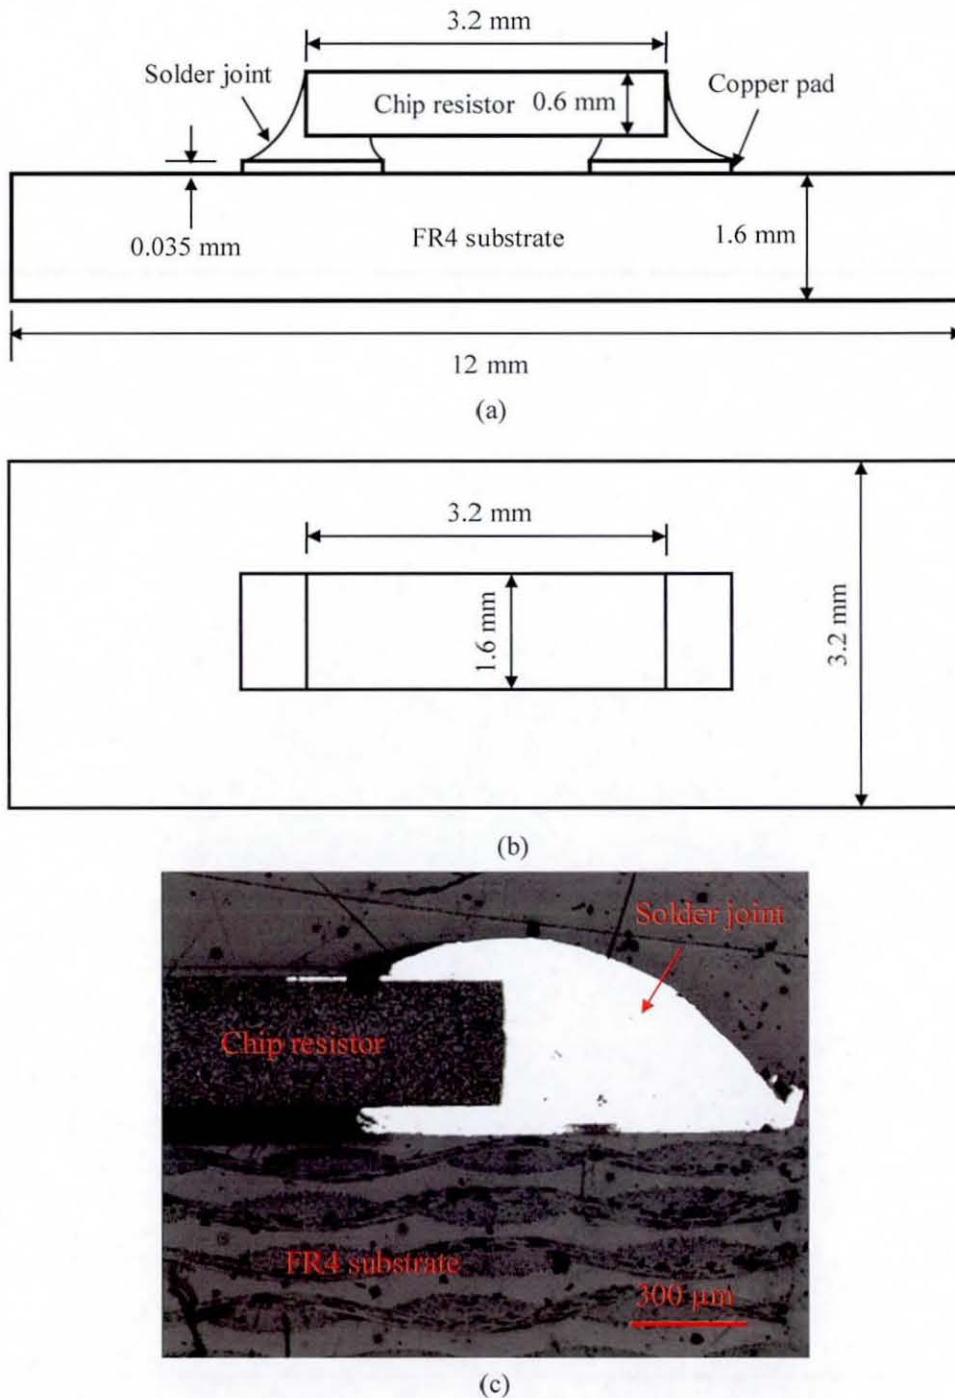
Components of the chip resistor assembly: (a) front view; (b) plan view; (c) actual cross section
